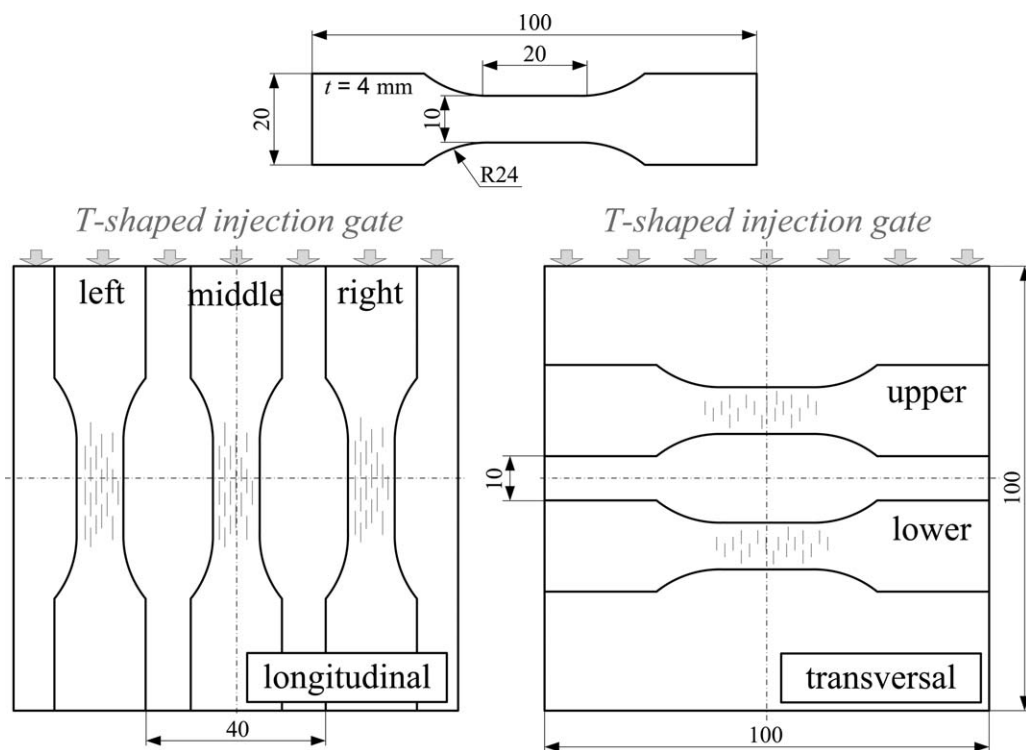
Specimen type 1: sampling and dimensions of short standardized testing specimens milled from injection moulded plates in mm.
